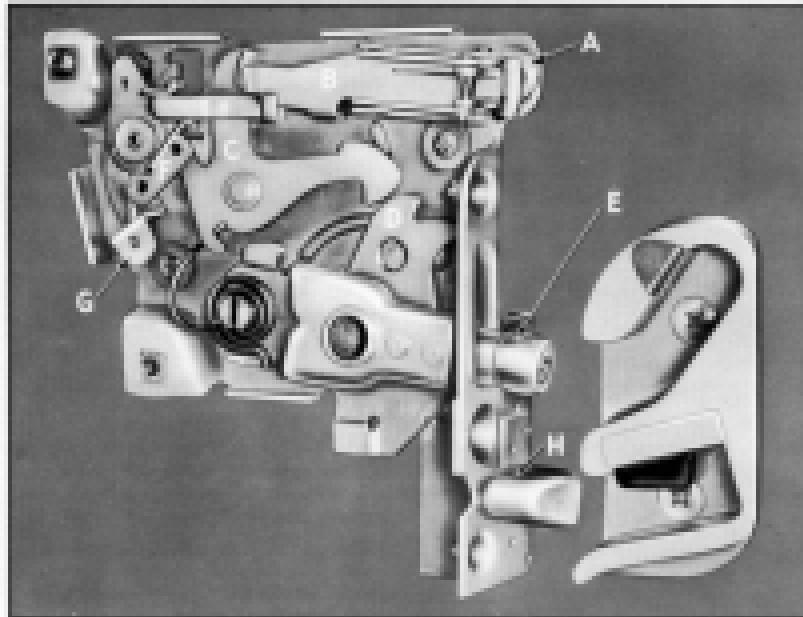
Details of 76 and 88 Body Lock Mechanism.
